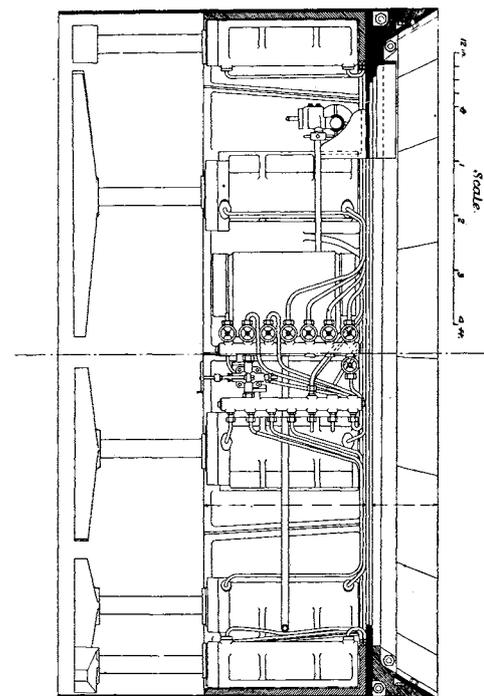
GREAT NORTHERN AND STRAND RAILWAY, LONDON.
